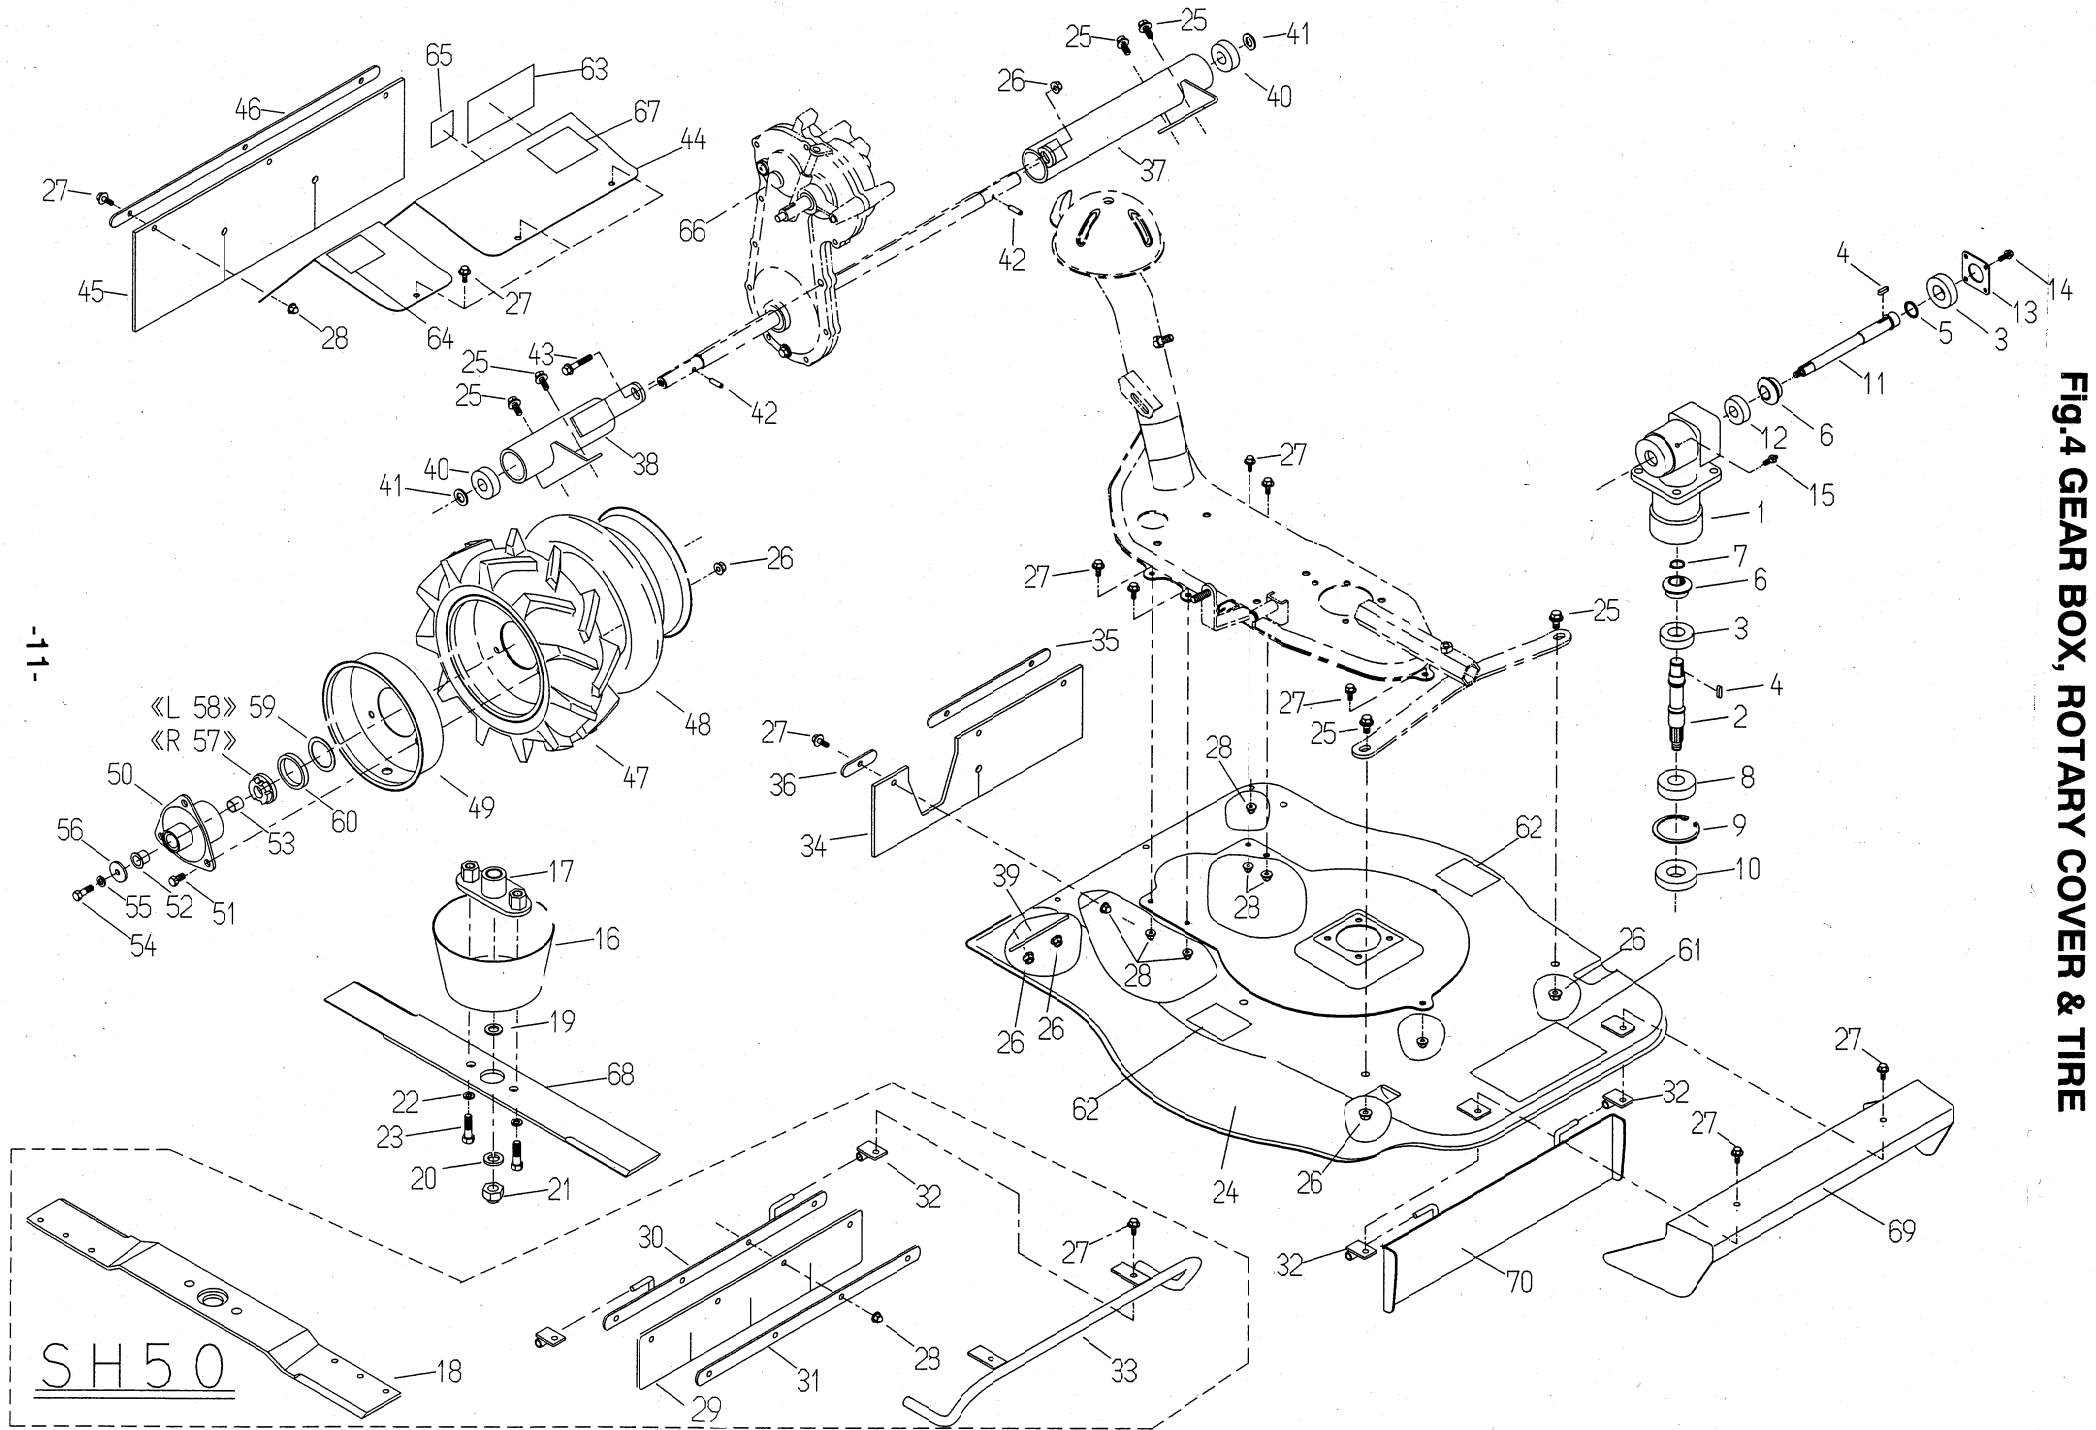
GEAR BOX, ROTARY COVER & TIRE
